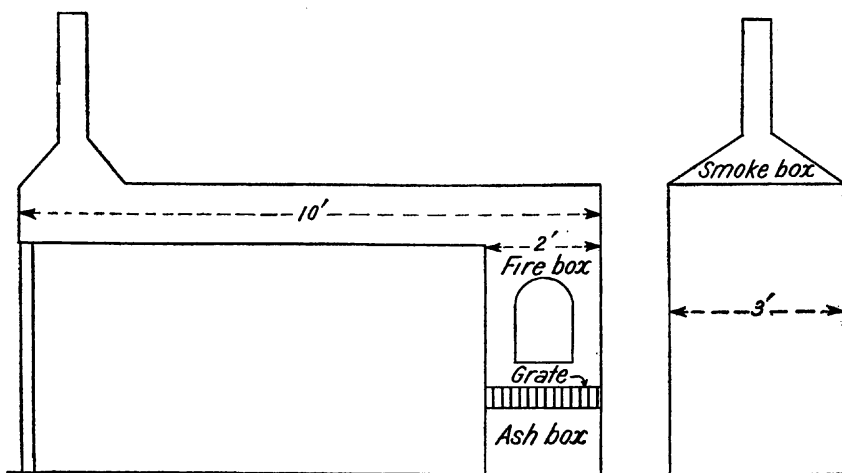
Side and end views of improvised furnace for evaporating drill samples of ore. Can be made by blacksmith out of $\frac{3}{8}$ -inch or $\frac{1}{2}$ -inch boiler plate. Smoke box of heavy sheet iron; smokestack, 6 feet of ordinary 6-inch stovepipe; evaporating pans, about 18 by 18 inches and 6 inches high, made of heavy sheet iron.
